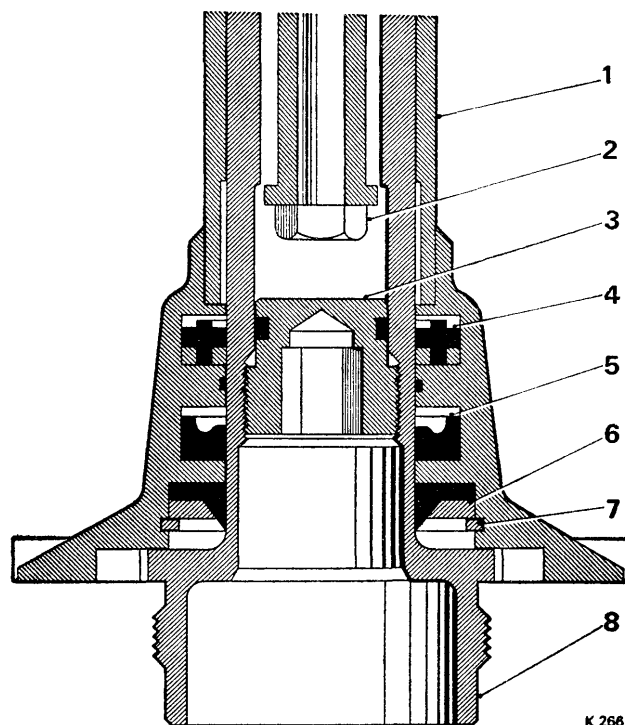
SECTIONAL VIEW—EARLY SEALING ARRANGEMENT—HEIGHT CONTROL RAMS
